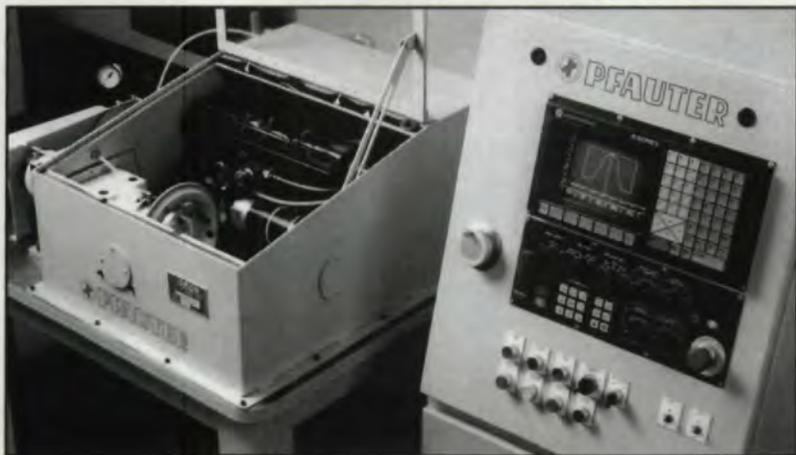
Orion 2-axis CNC dresser for dressing profile grinding wheels off the machine. Used commonly with dressable CBN media and SG media.
